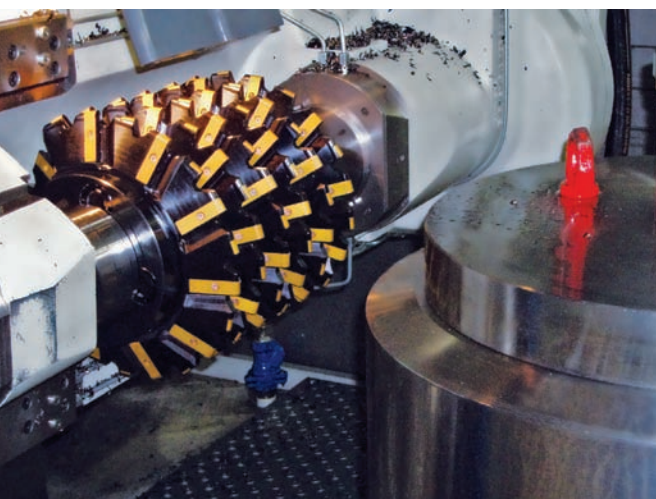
This gear hob for roughing of external and internal gears is equipped with high-performance indexable inserts of CVD-coated grade GC4240. In one application involving a production of 1,000 planteray gears per year, the gear milling operation was improved through increasing the number of parts per insert edge by 35 %, adding higher security compared to the existing solution.
